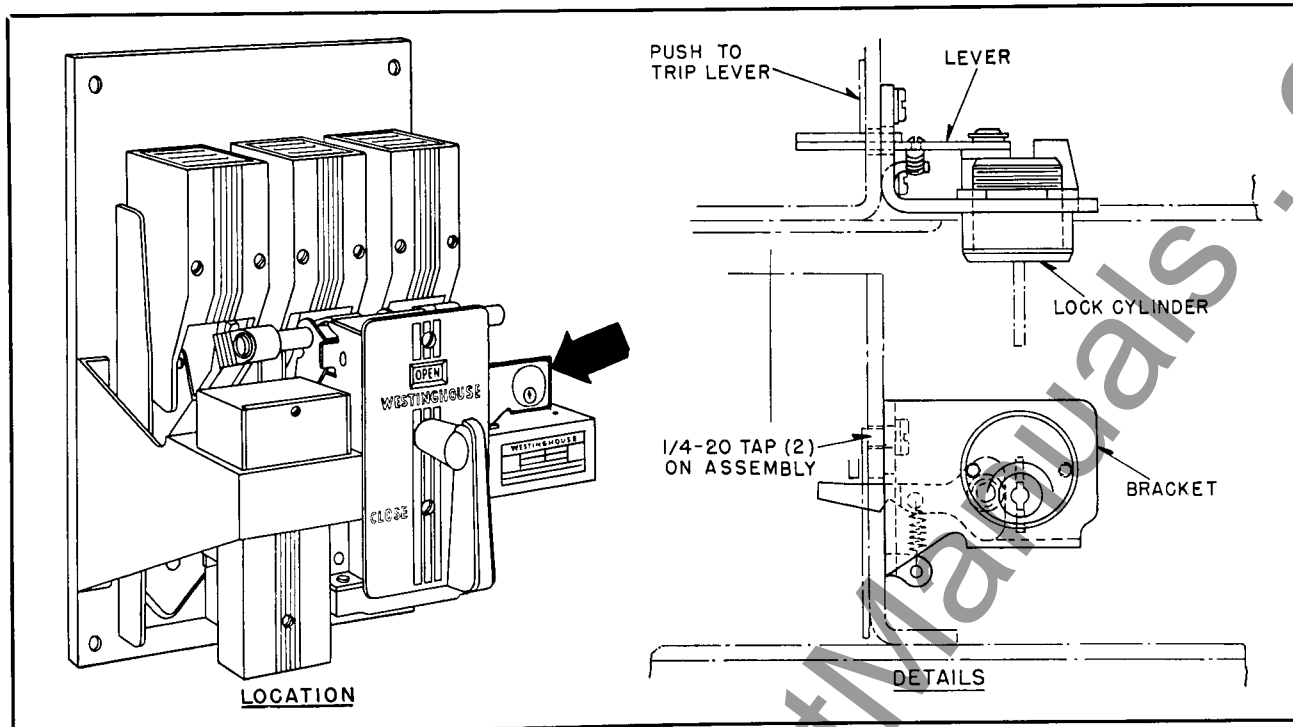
Key Interlock Attachment For Fixed Breaker—Location and Construction Details
